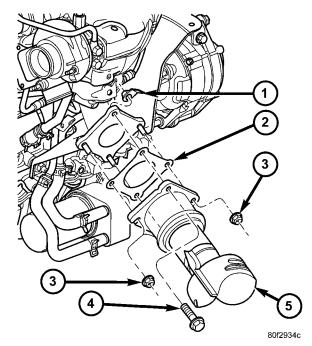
Converter to Exhaust Manifold Connection - 2.4L Turbo
